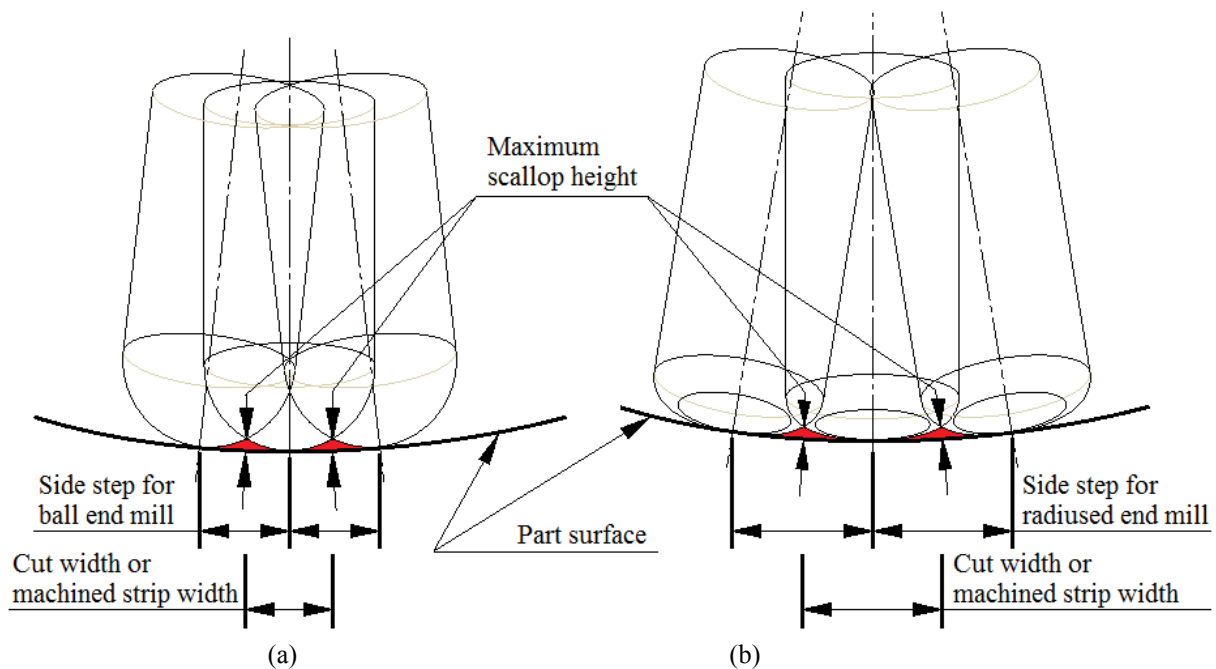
Comparison of machined strip width for equal scallop height while machining with: (a) a ball end mill, and (b) a radiused end mill
